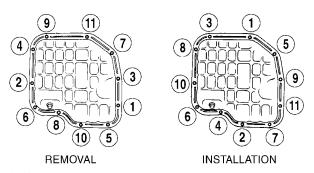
Lower Oil Pan Bolt Removal & Installation Sequence Courtesy of Nissan Motor Co., U.S.A.
